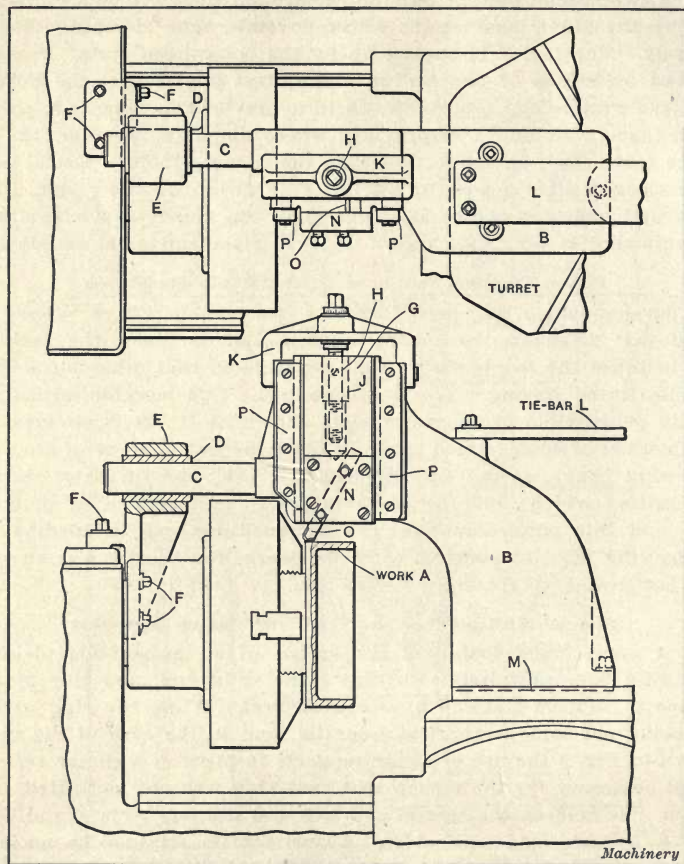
Adjustable Piloted Turning Tool for Large Work
